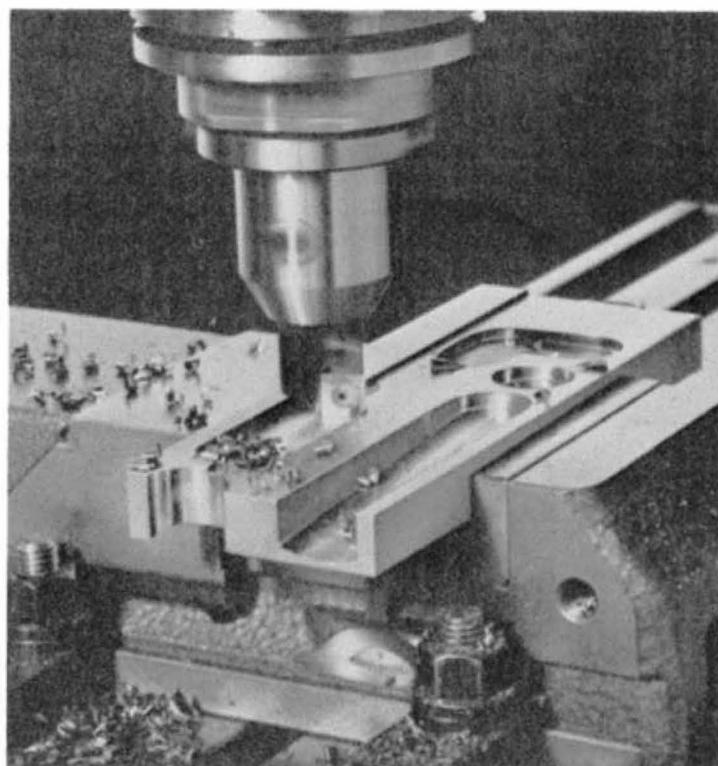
Rough cutting end mill taking a typical cut in a workpiece.
